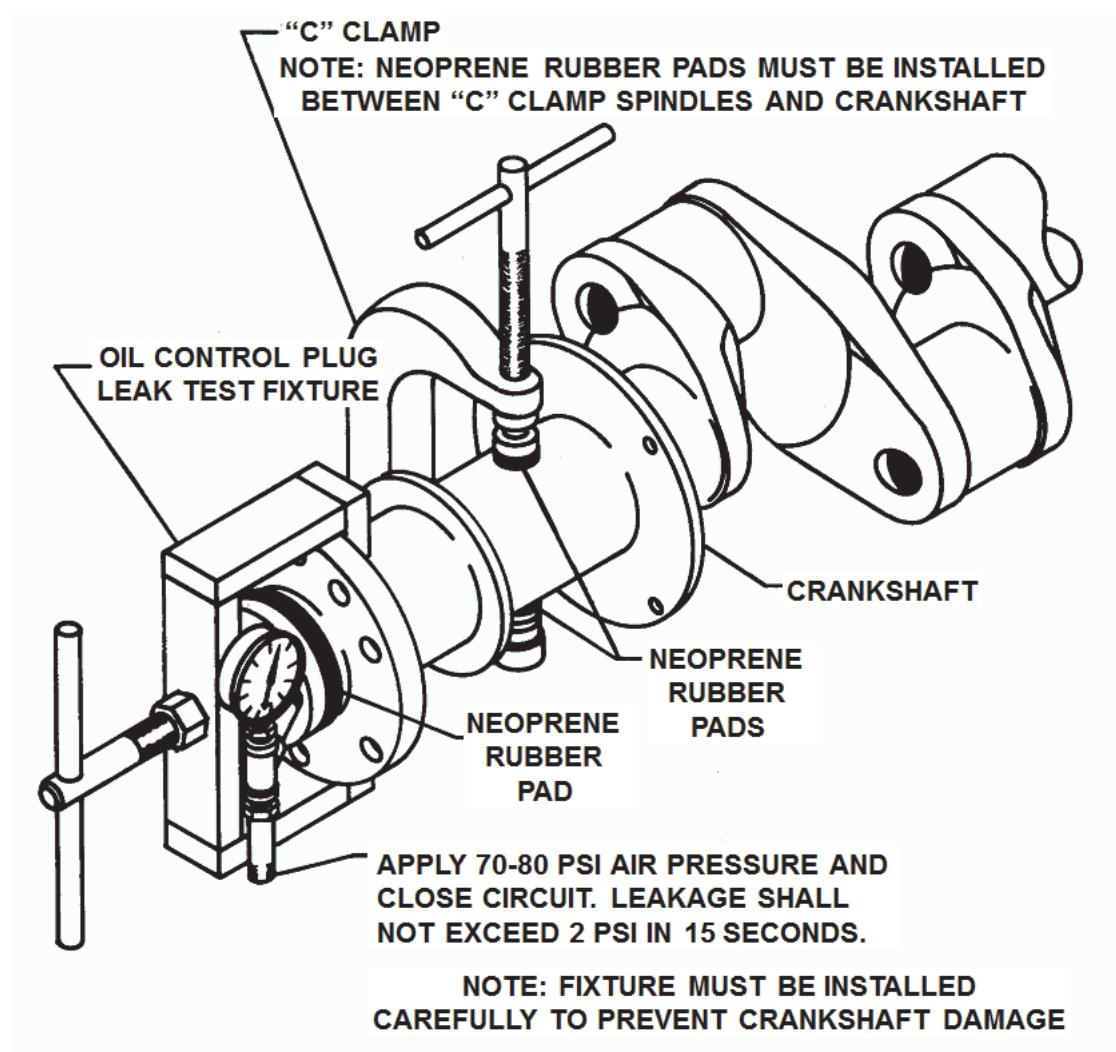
Oil Control Plug/Crankshaft Pressure Test
